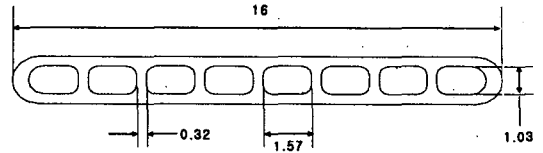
Cross-sectional view of the flat tube used in this study (Unit: mm).
